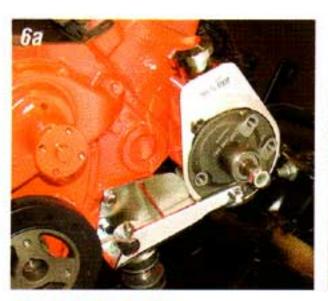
& 6b: The chrome power steering pump P/N 207-43 bolts to the new power steering bracket with a chrome 9/16" X 1" bolt, flat washer and lock washer. The rear of the pump has a stud that fits in a groove in the back of the bracket. The rear stud is secured to the bracket with a chrome nut, flat washer and lock washer.
